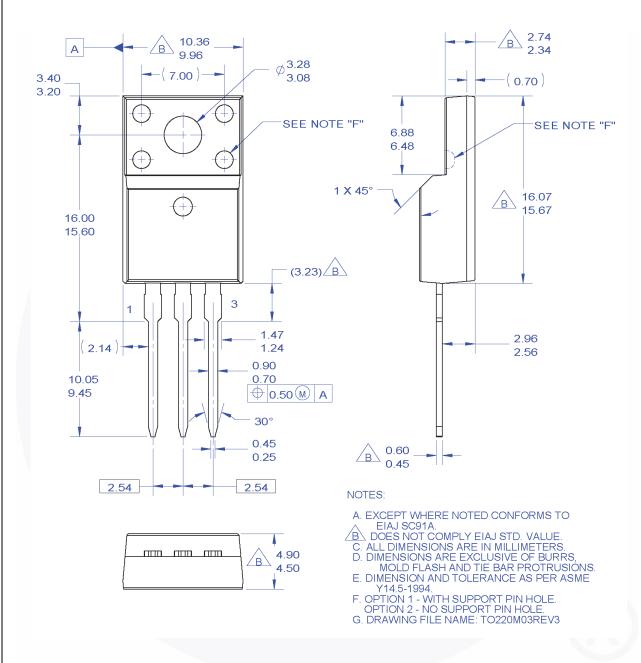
TO220, Molded, 3-Lead, Full Pack, EIAJ SC91, Straight Lead
